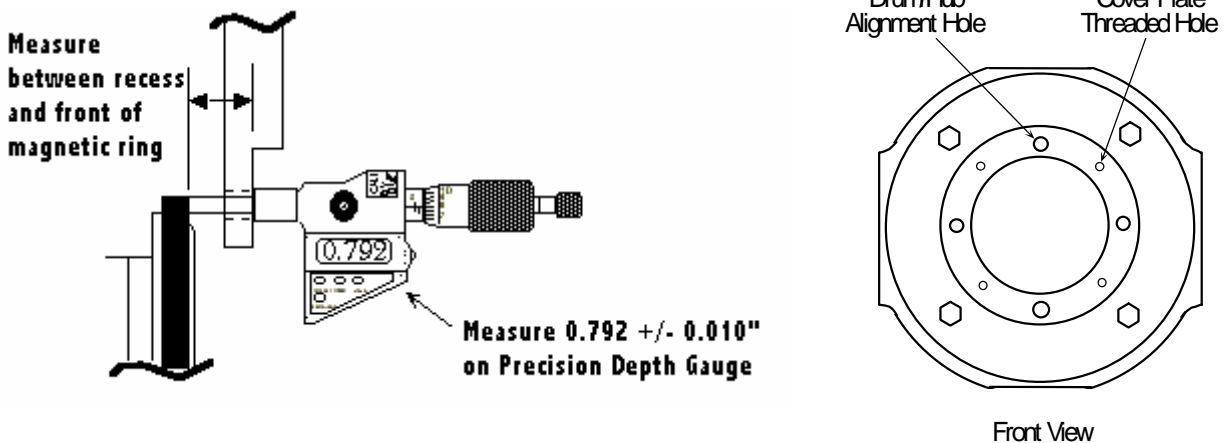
Optional Pulse Wheel Alignment Check w/ Depth Gauge
